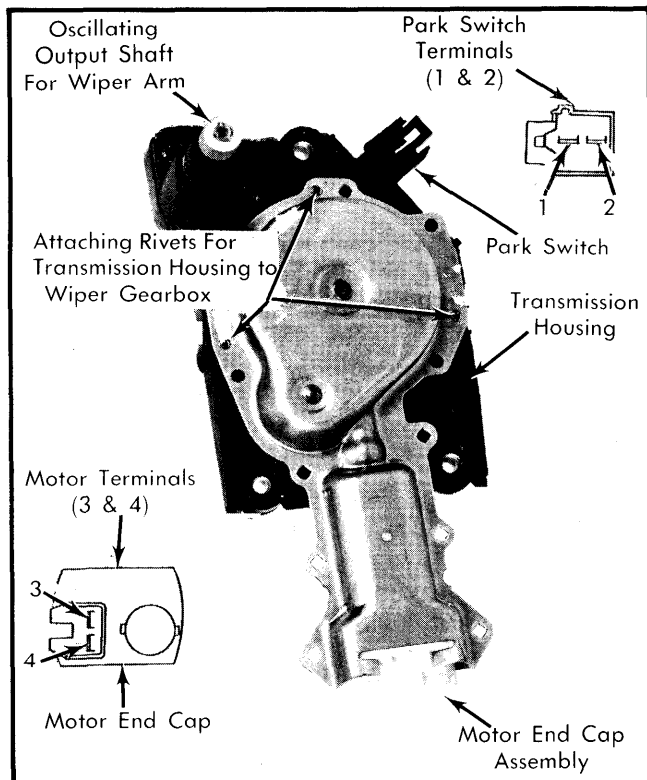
General Motors Liftgate Wiper Motor Assembly
